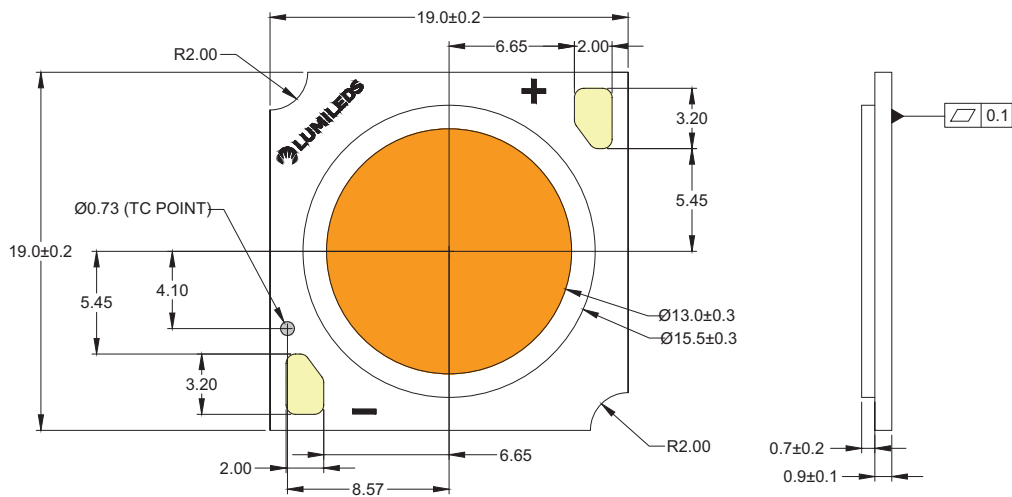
Mechanical dimensions for L2C6-xxxxxL05x1300 and L2C6-xxxxxL06x1300
